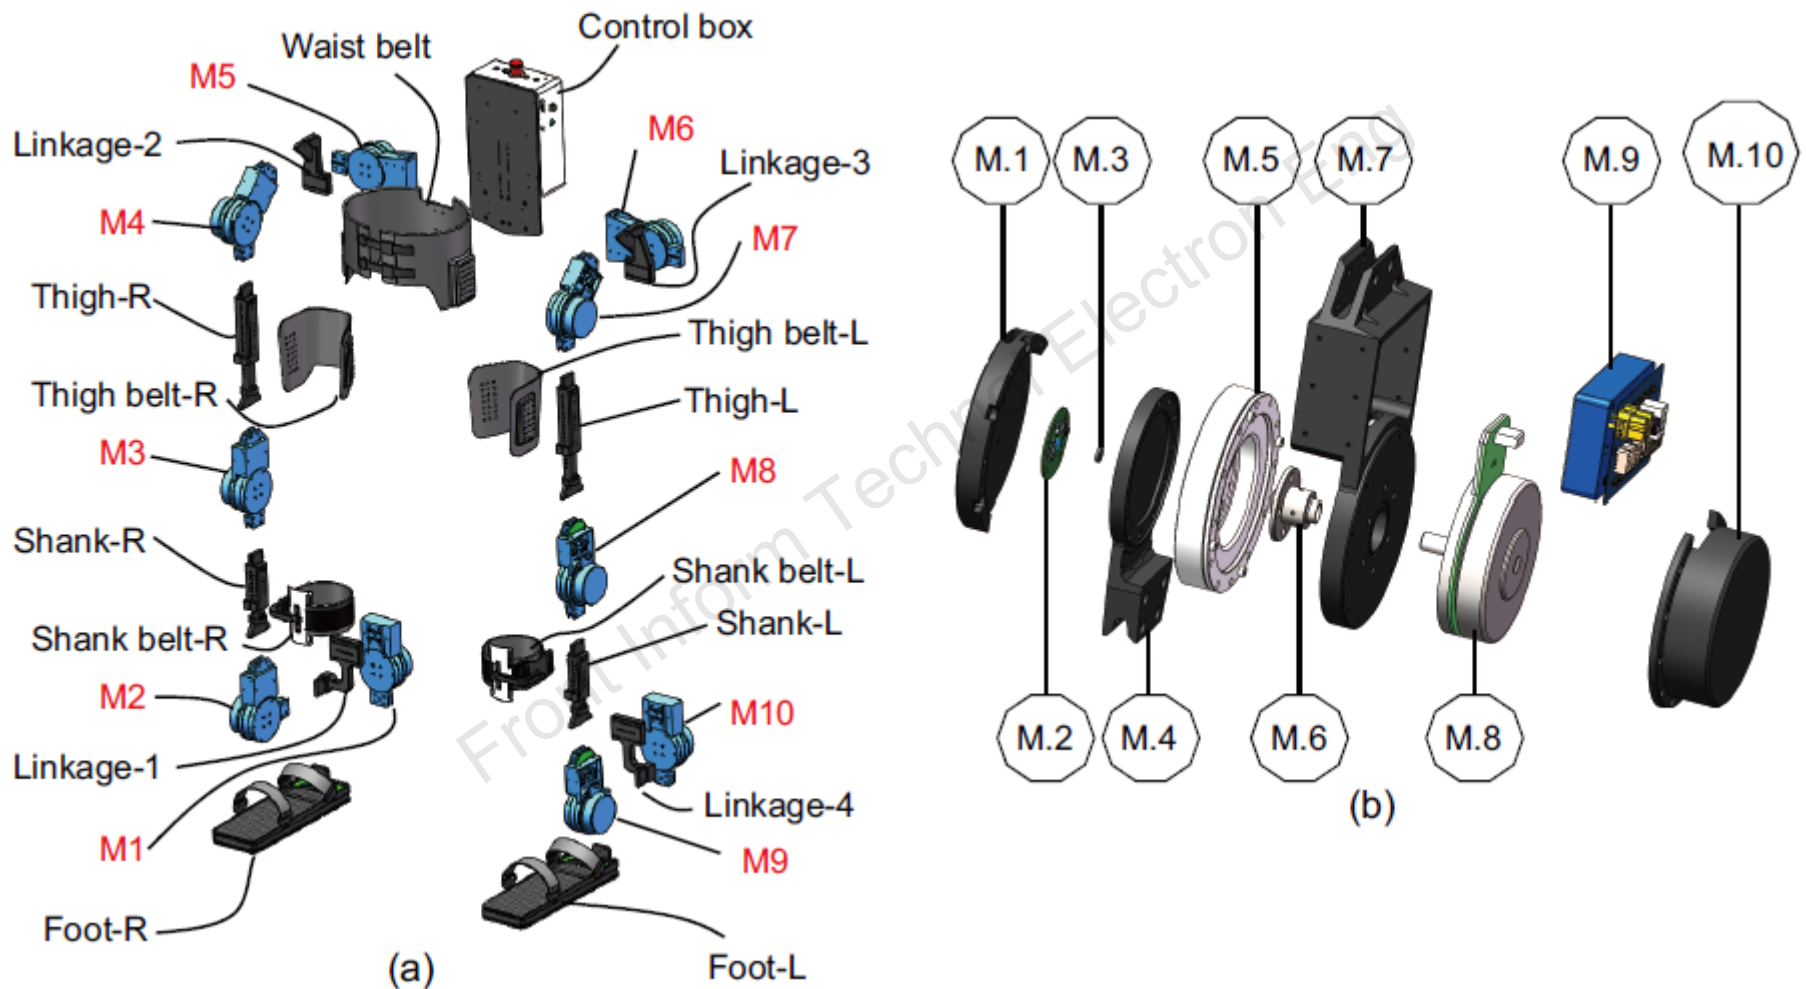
Exploded views of the exoskeleton (a) and the modular drive unit (b)
